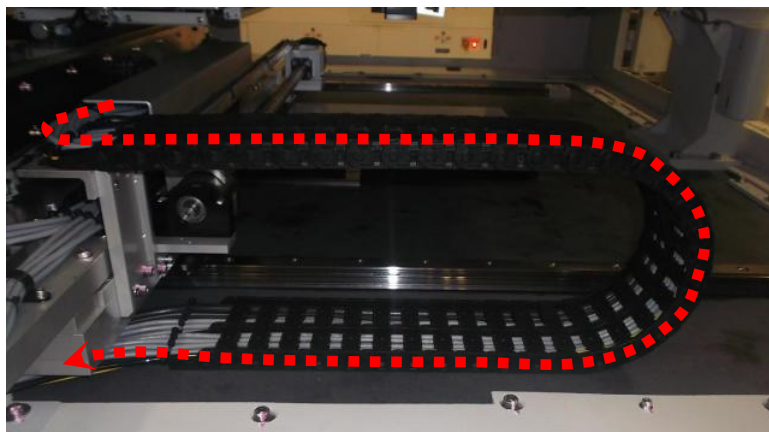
Stepper Motor Cable Removal (Y axis Wide E-Chain)
